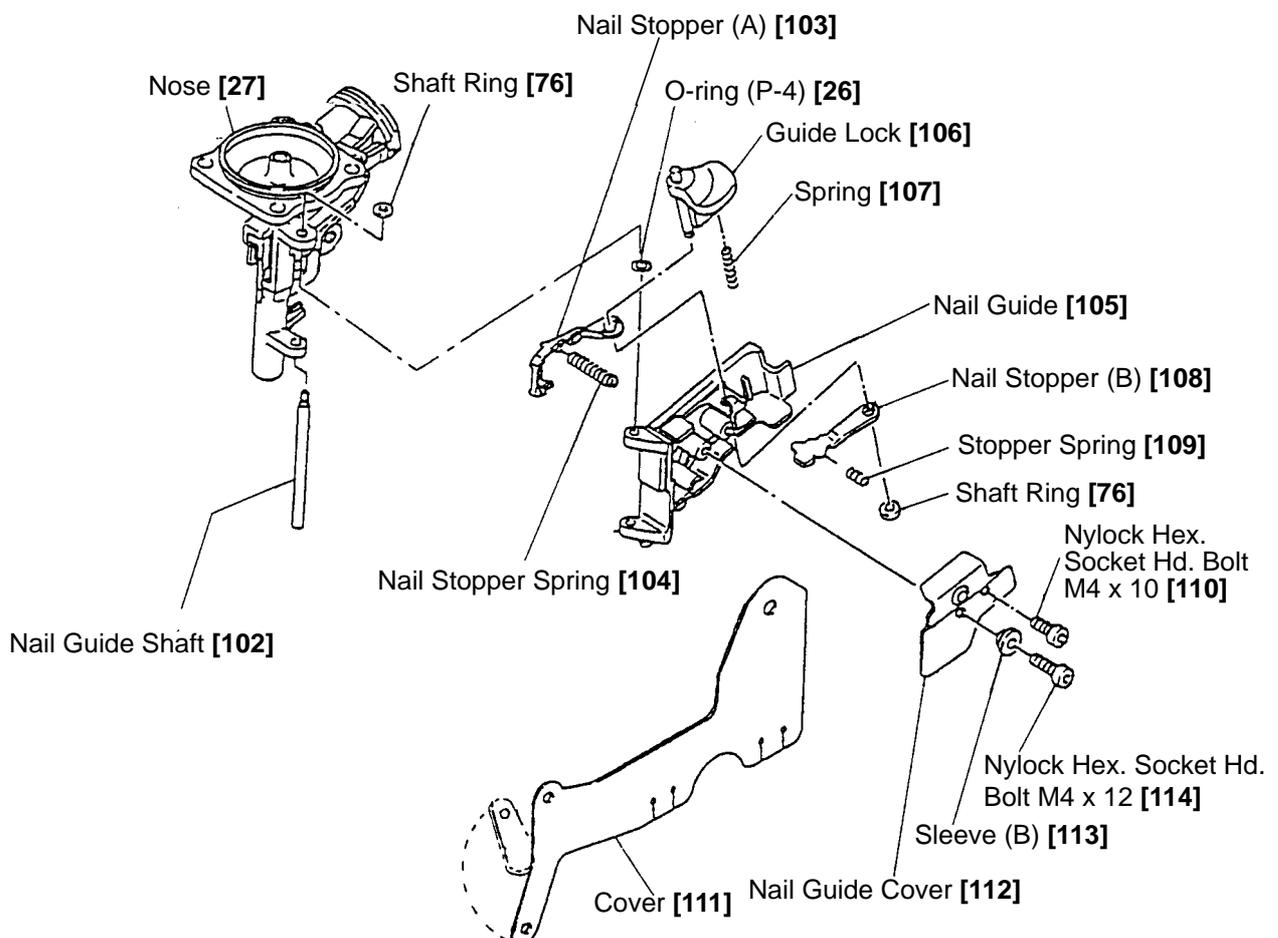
Disassembly and reassembly of nail guide, nail stopper (A), nail stopper (B) and other parts
